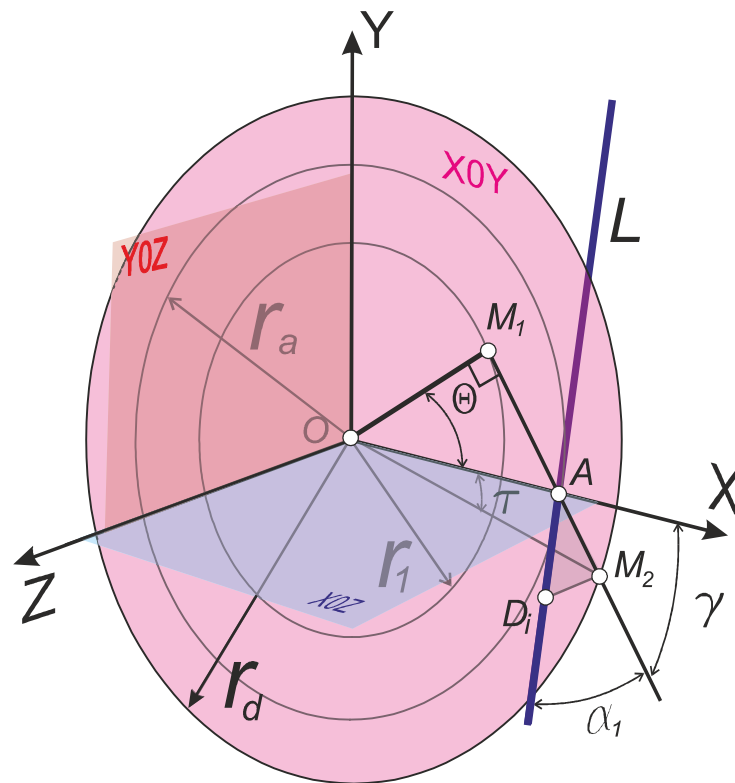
Schematic of the rake surface placement of the thread cutter in cylindrical coordinates.
